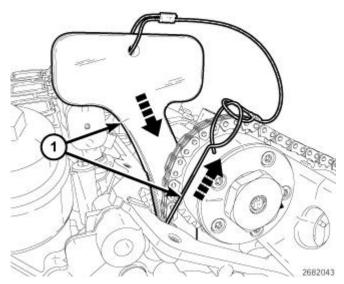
Positioning Timing Chain Holder To Force Rack & Piston Back Into Tensioner Body Courtesy of CHRYSLER GROUP, LLC
